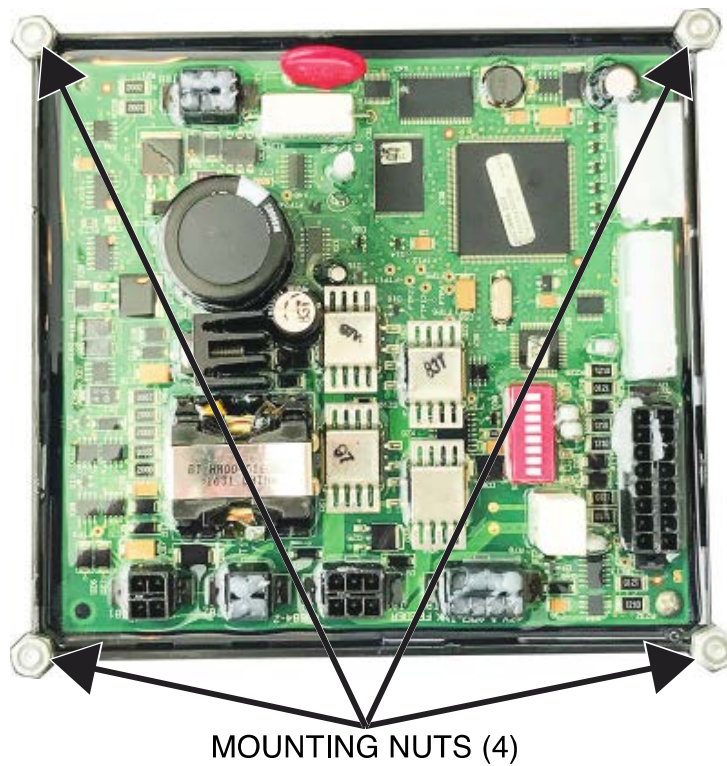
42V & ArcLink feeder board mounting nut locations
